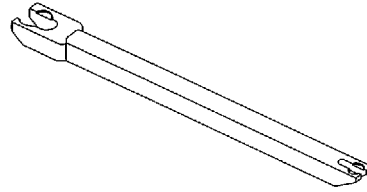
Sleeve Tool (A-dec Part No. 98.0072.00)
